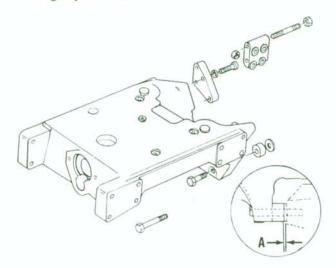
Use a feeler gauge to measure gap (A) between the lower ears of casting and spacer tubes for 399 models.
